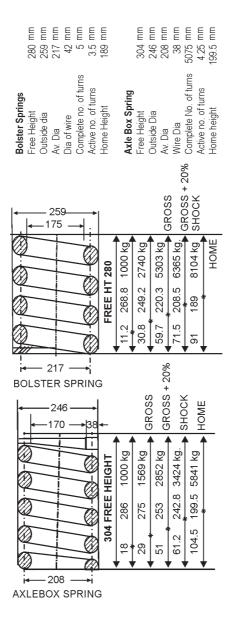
Bolster and Axle Box Spring (Trailor coach)
